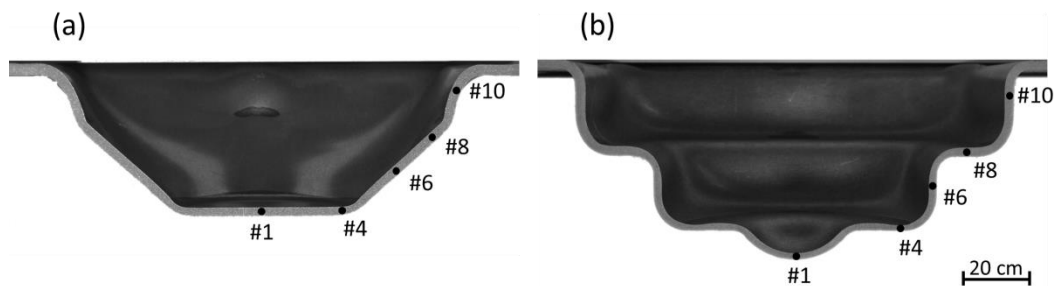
Cross-sections of the formed AA5083 parts at 400 °C: (a) hot drawing and (b) gas forming. The 43 mm stroke was used.
